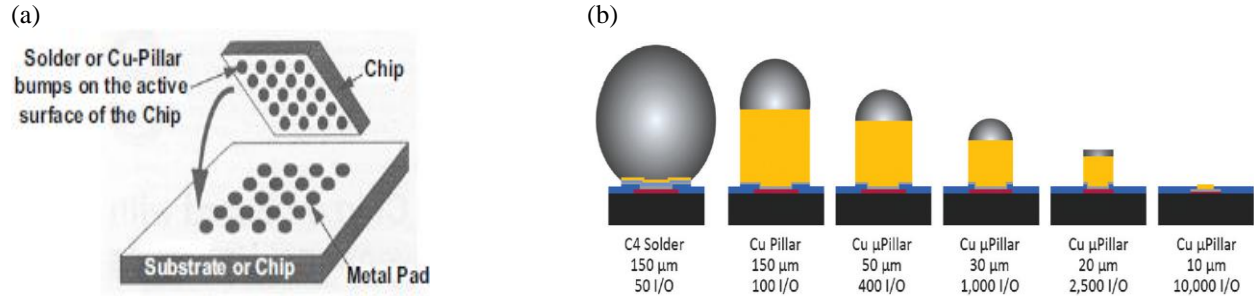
(a) Schematic Diagram of Flip Chip Assembly (Lau, 2018), (b) Flip Chip Interconnect Bumping from C4 Solder to Direct Cu (Gregorich & Gu, 2019)
